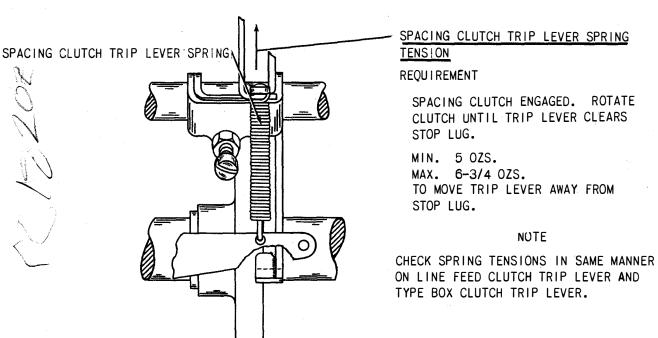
Automatic Typer, Spacing Clutch Mechanism
